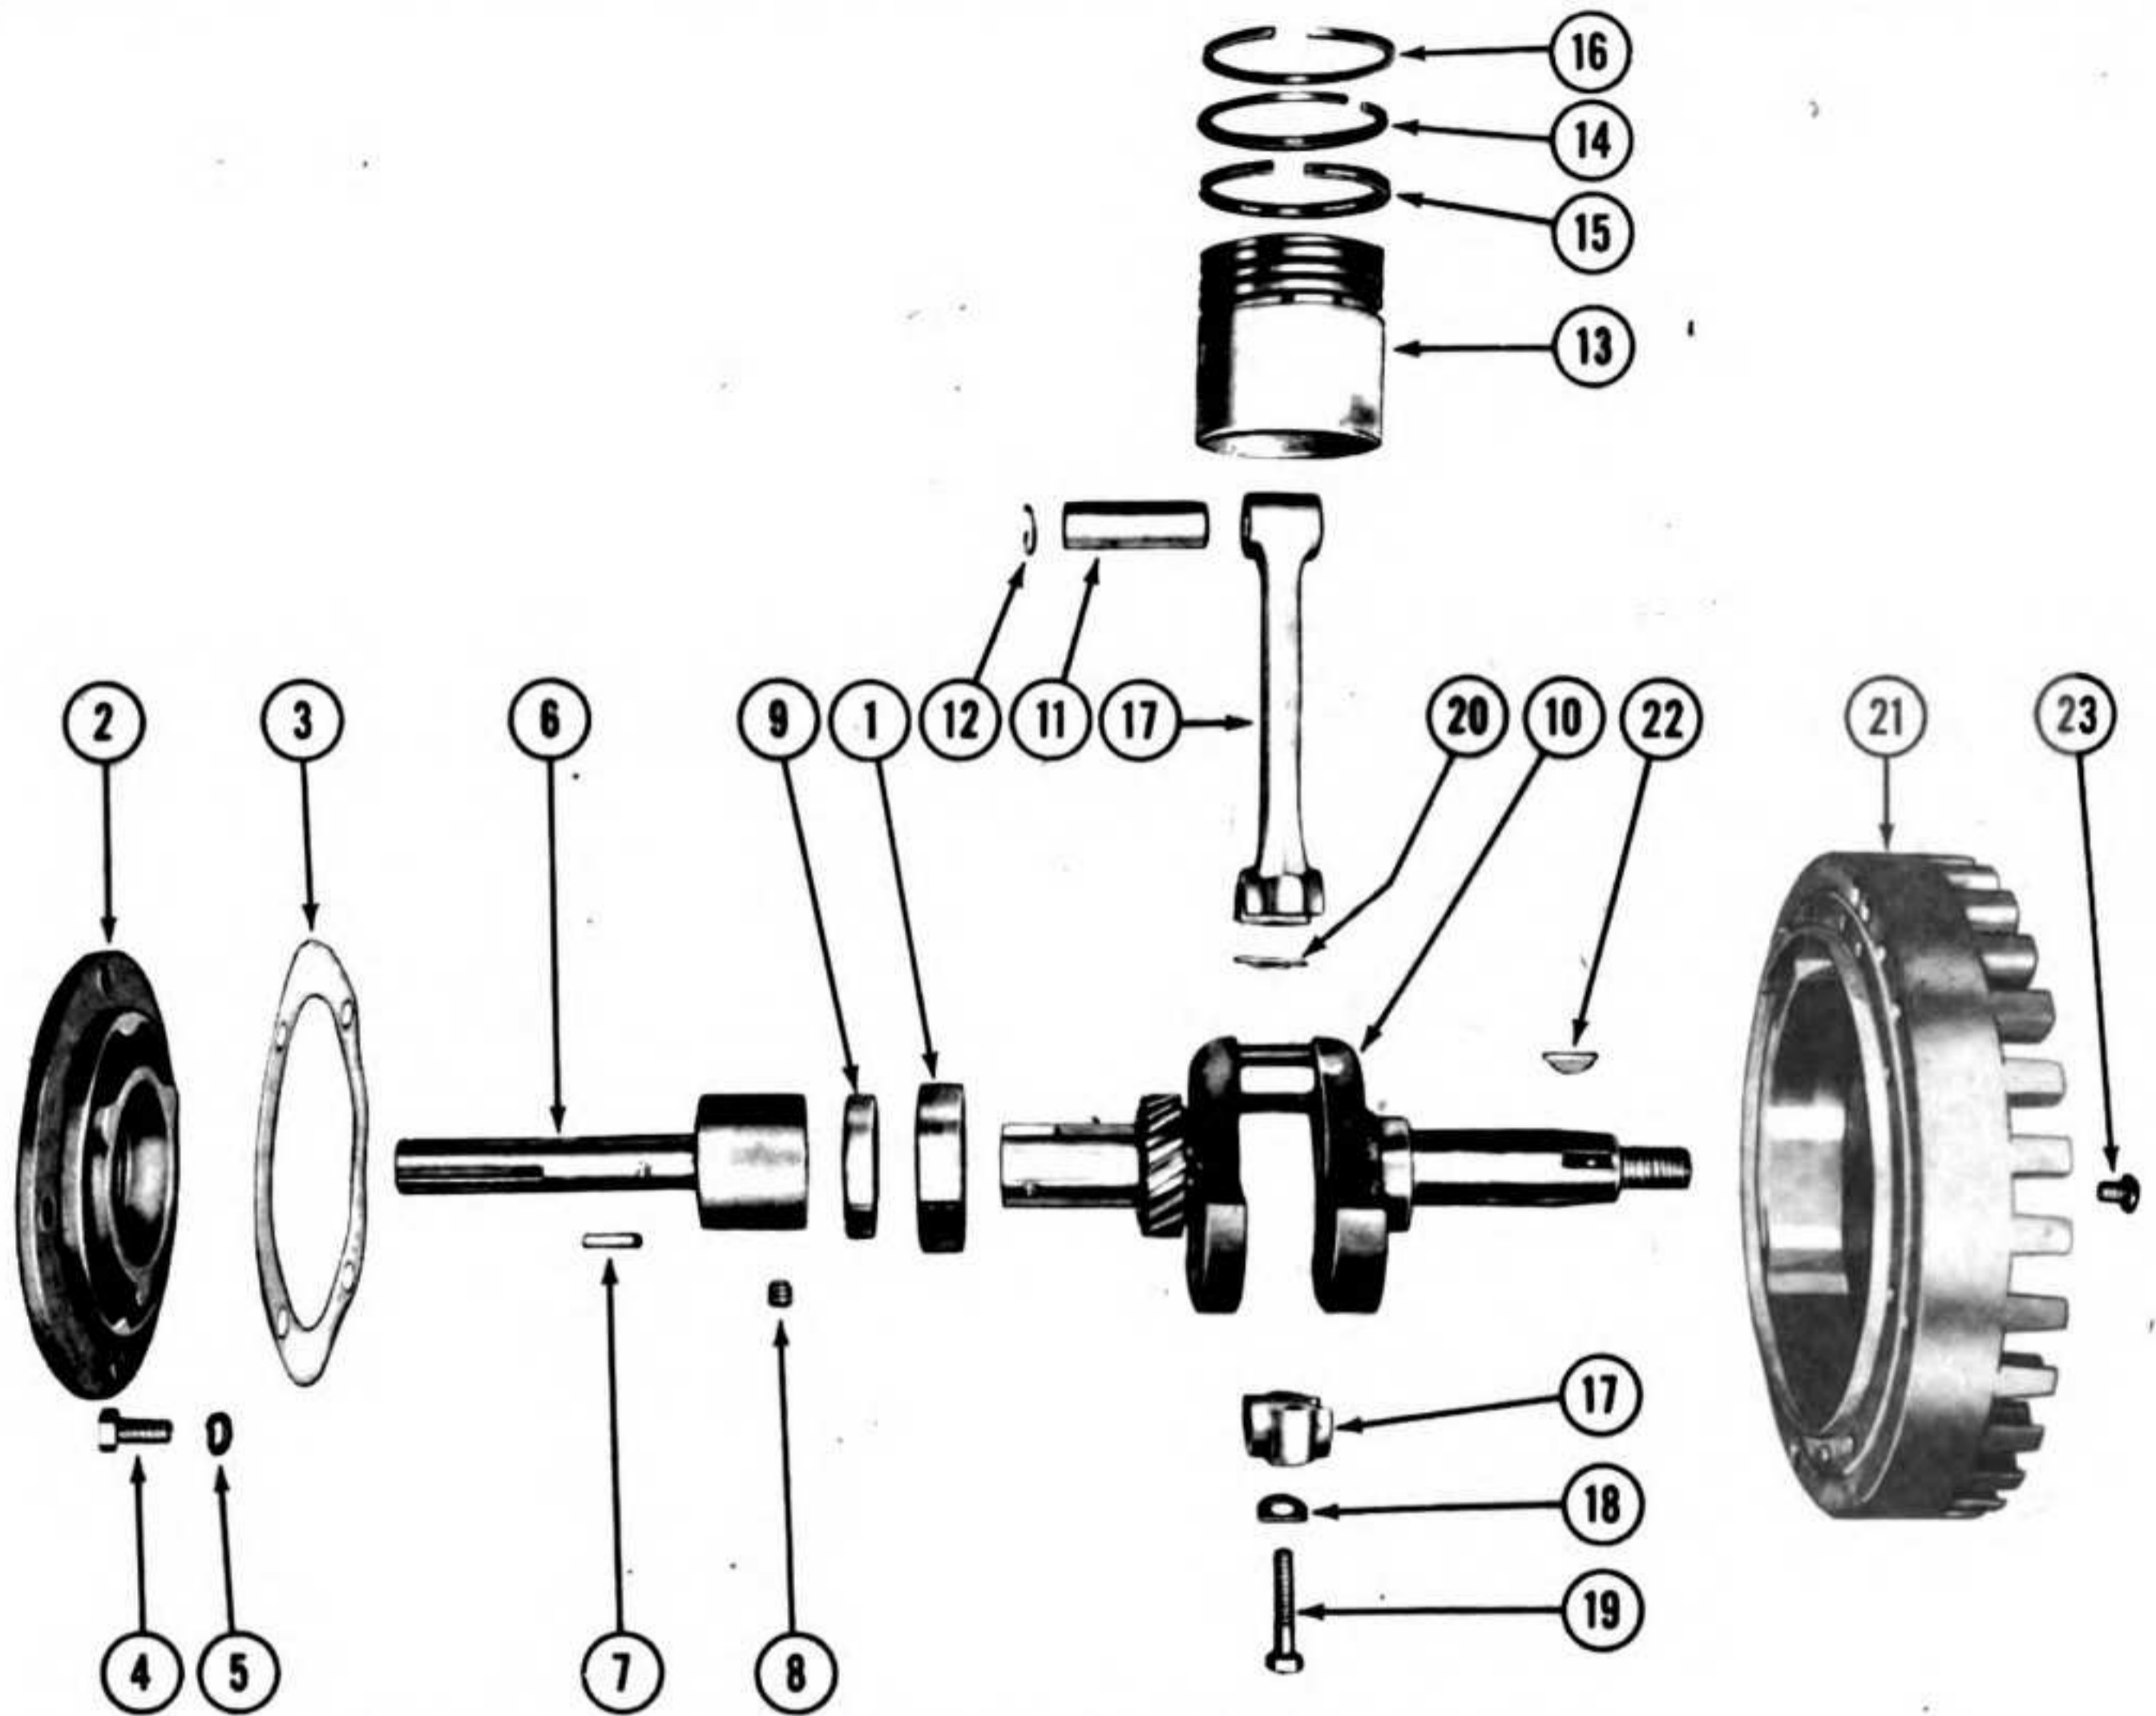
Connecting Rod, Piston, Crankshaft, and Flywheel
